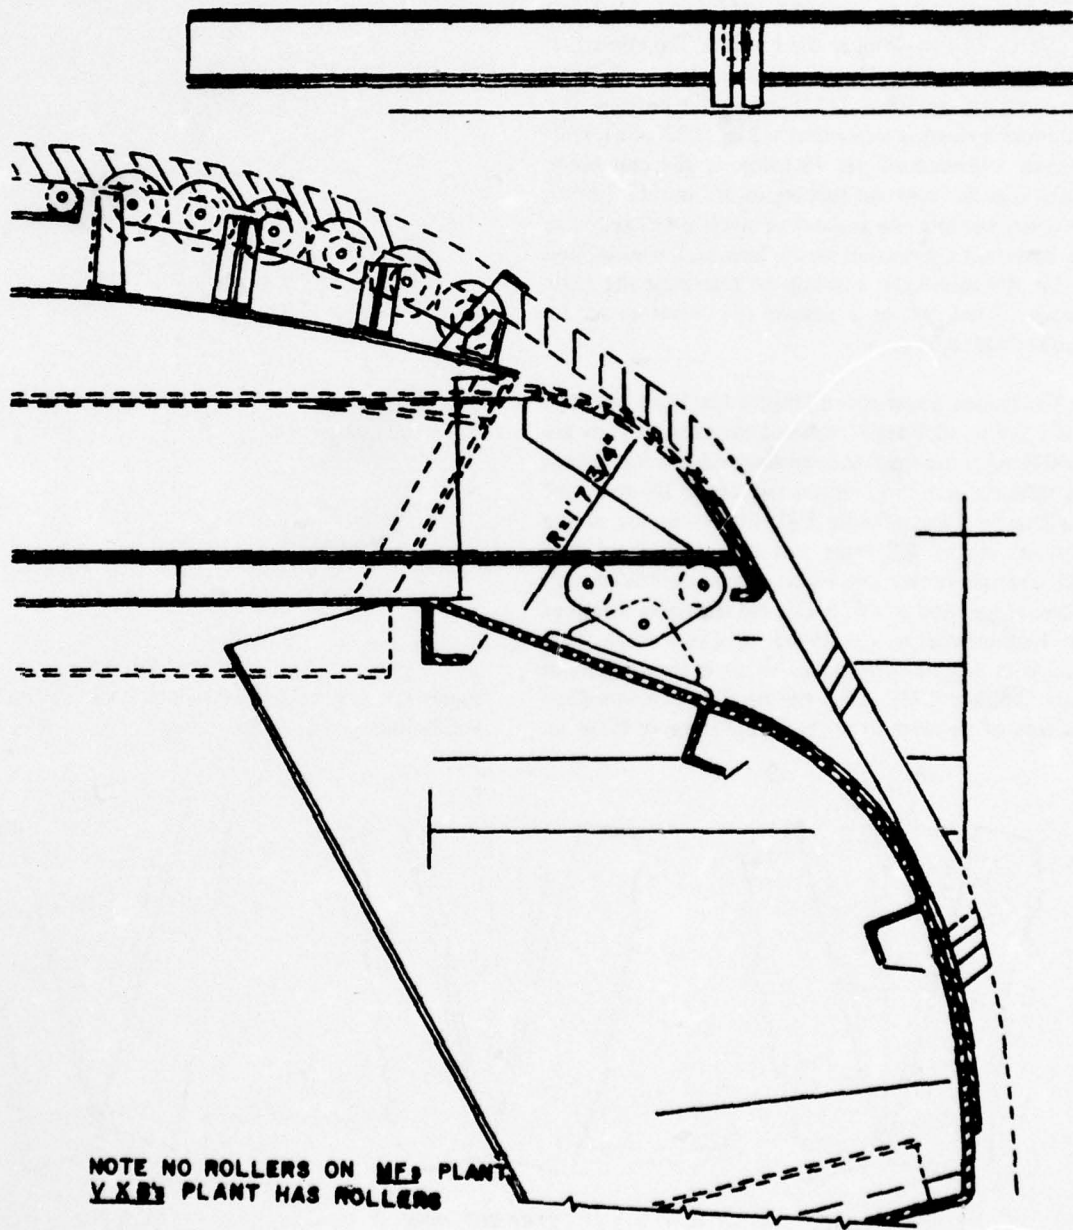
Section of launch plant showing launch fingers and curved bearing surfaces.
